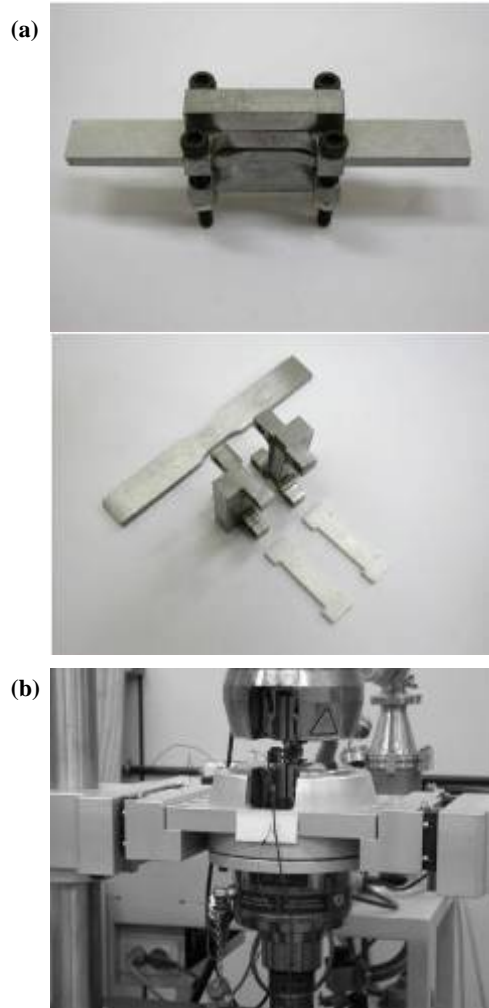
Photographs showing (a) anti-buckling guide and (b) equipment for fixing the actuator
